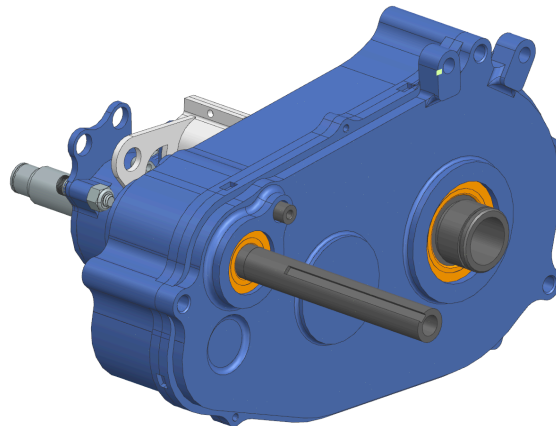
Custom gearbox developed by the MBR Team. The gearbox consists of a double reduction gear set with a forward gear train and a reverse gear train.
